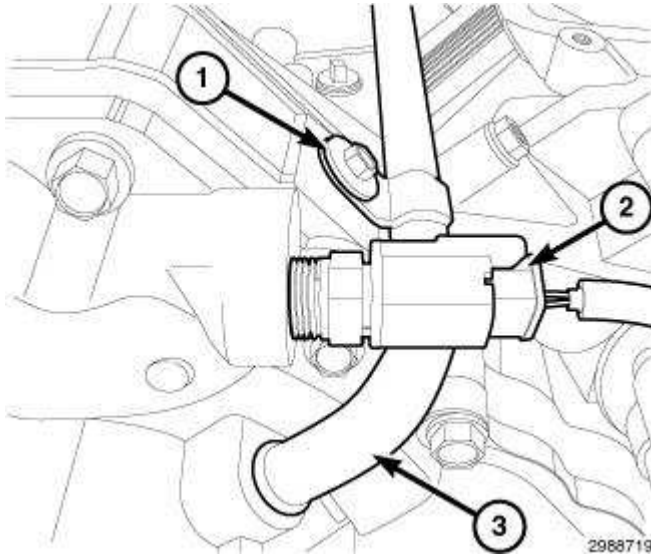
Coolant Temperature (ECT) Sensor Electrical Connector, Heater Tube & Retaining Bolt
